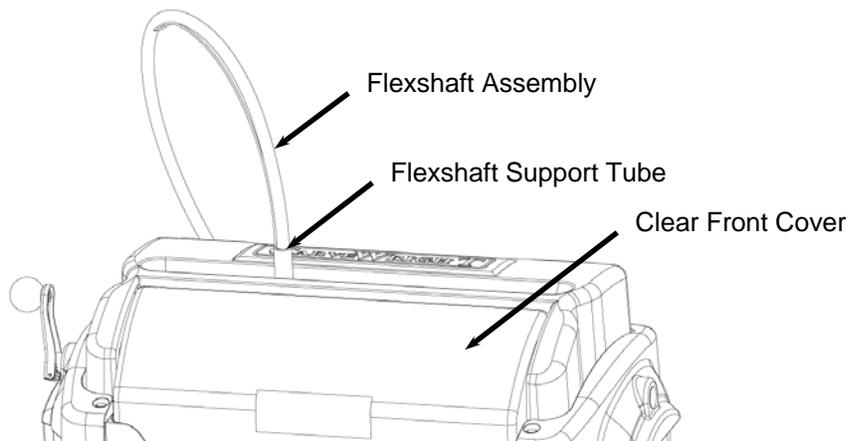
EXTERIOR VIEW OF THE FLEXSHAFT AND HEAD COVERS
